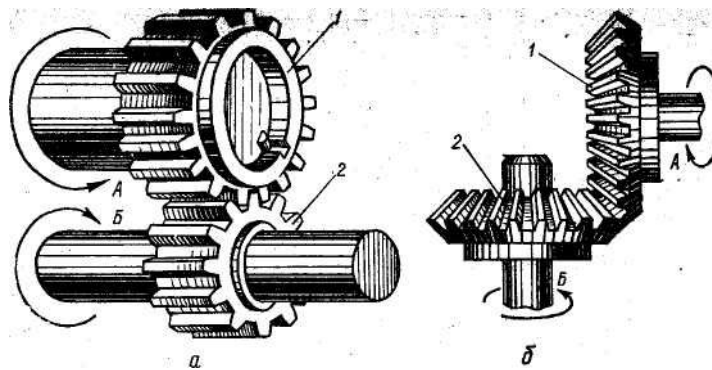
a. spur gears engaging b. spiral bevel gears engaging
